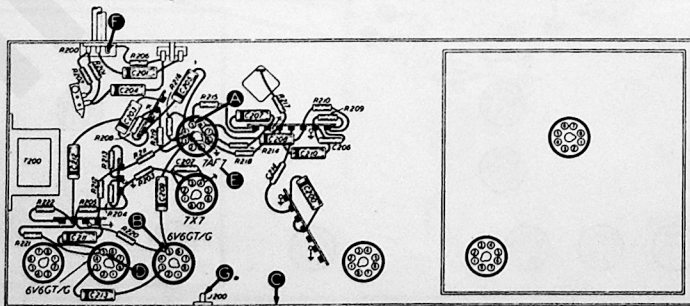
Bottom view, showing Section 2 test points. TP-453F
